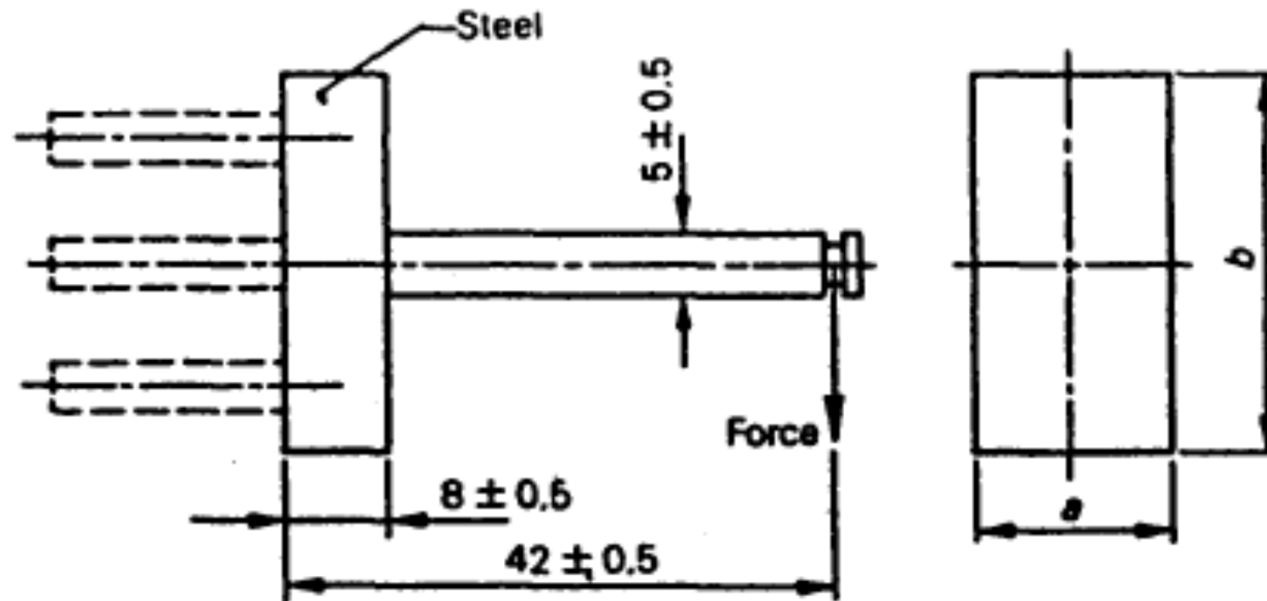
GAUGE FOR CHECKING NON-ACCESSIBILITY OF LIVE PARTS, THROUGH SHUTTERS, AND OF LIVE PARTS OF SOCKET-OUTLETS WITH INCREASED PROTECTION
